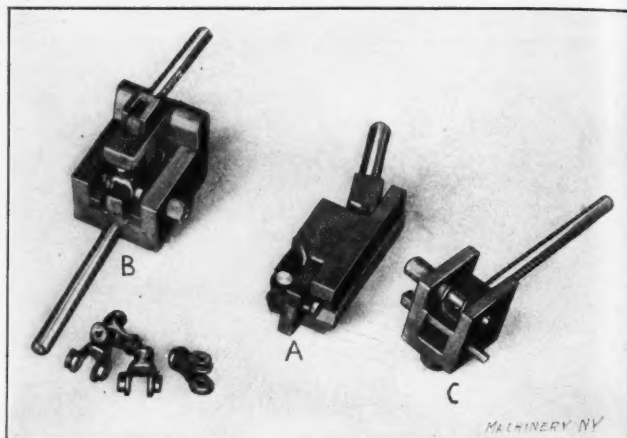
Use of the Rocker Arm Clevis Milling and Drilling Jigs
